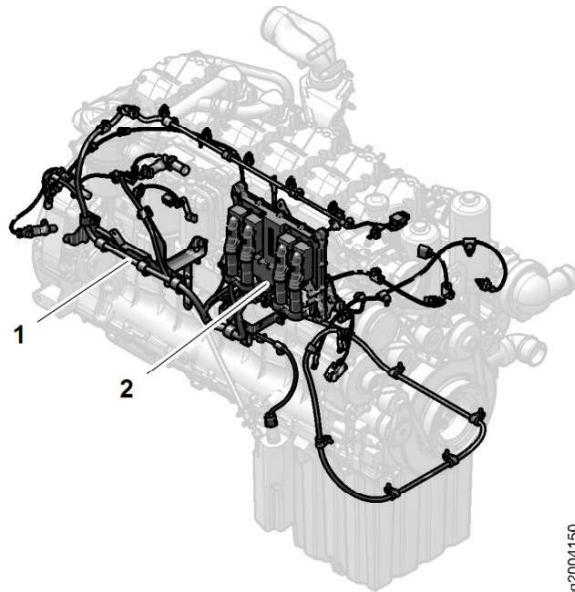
Engine: Checking the fastening of the engine control units ad the sensor cable connections
